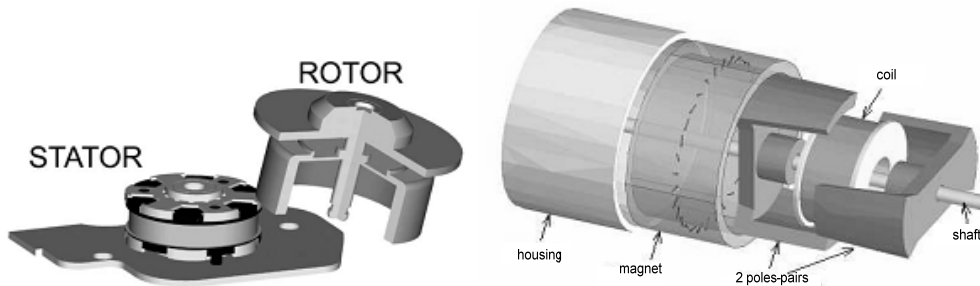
a) Pancake-type spindle motor, b) Single phase claw pole PMSM [29]
